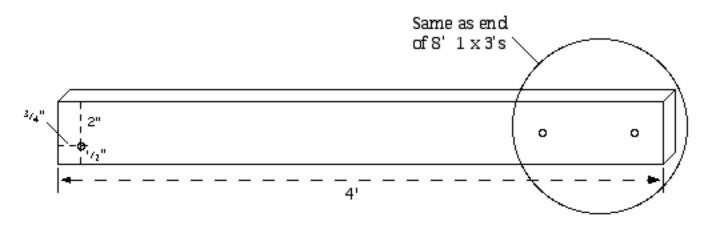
Drilling the 4' 1 x 3 (D Piece)
